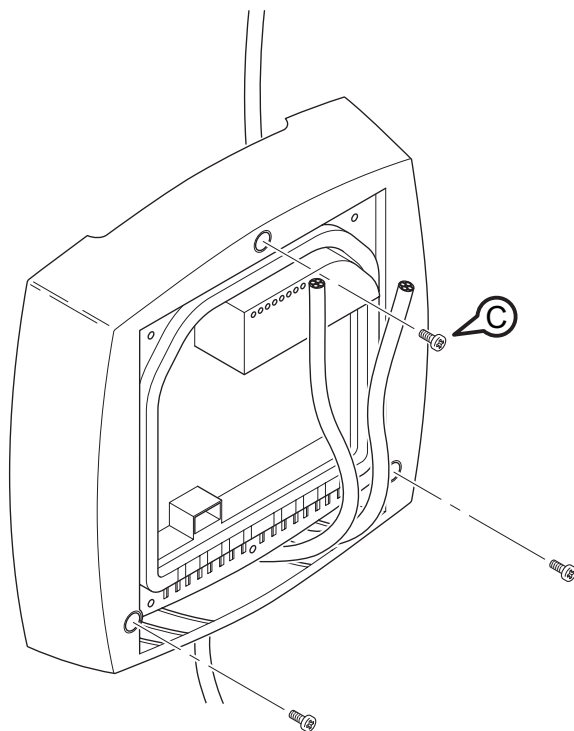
Screwing a SCALANCE W786 to a mounting plate
